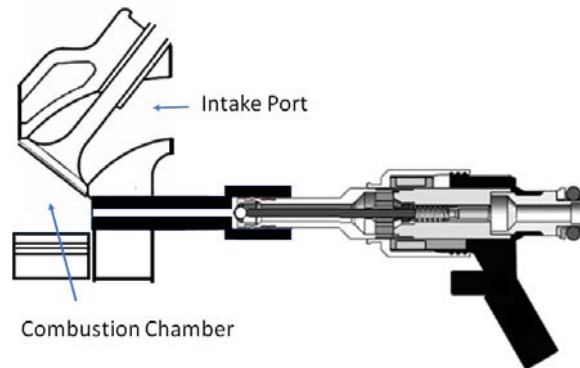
Schematic of a cross-sectional view of the injector installation method.
